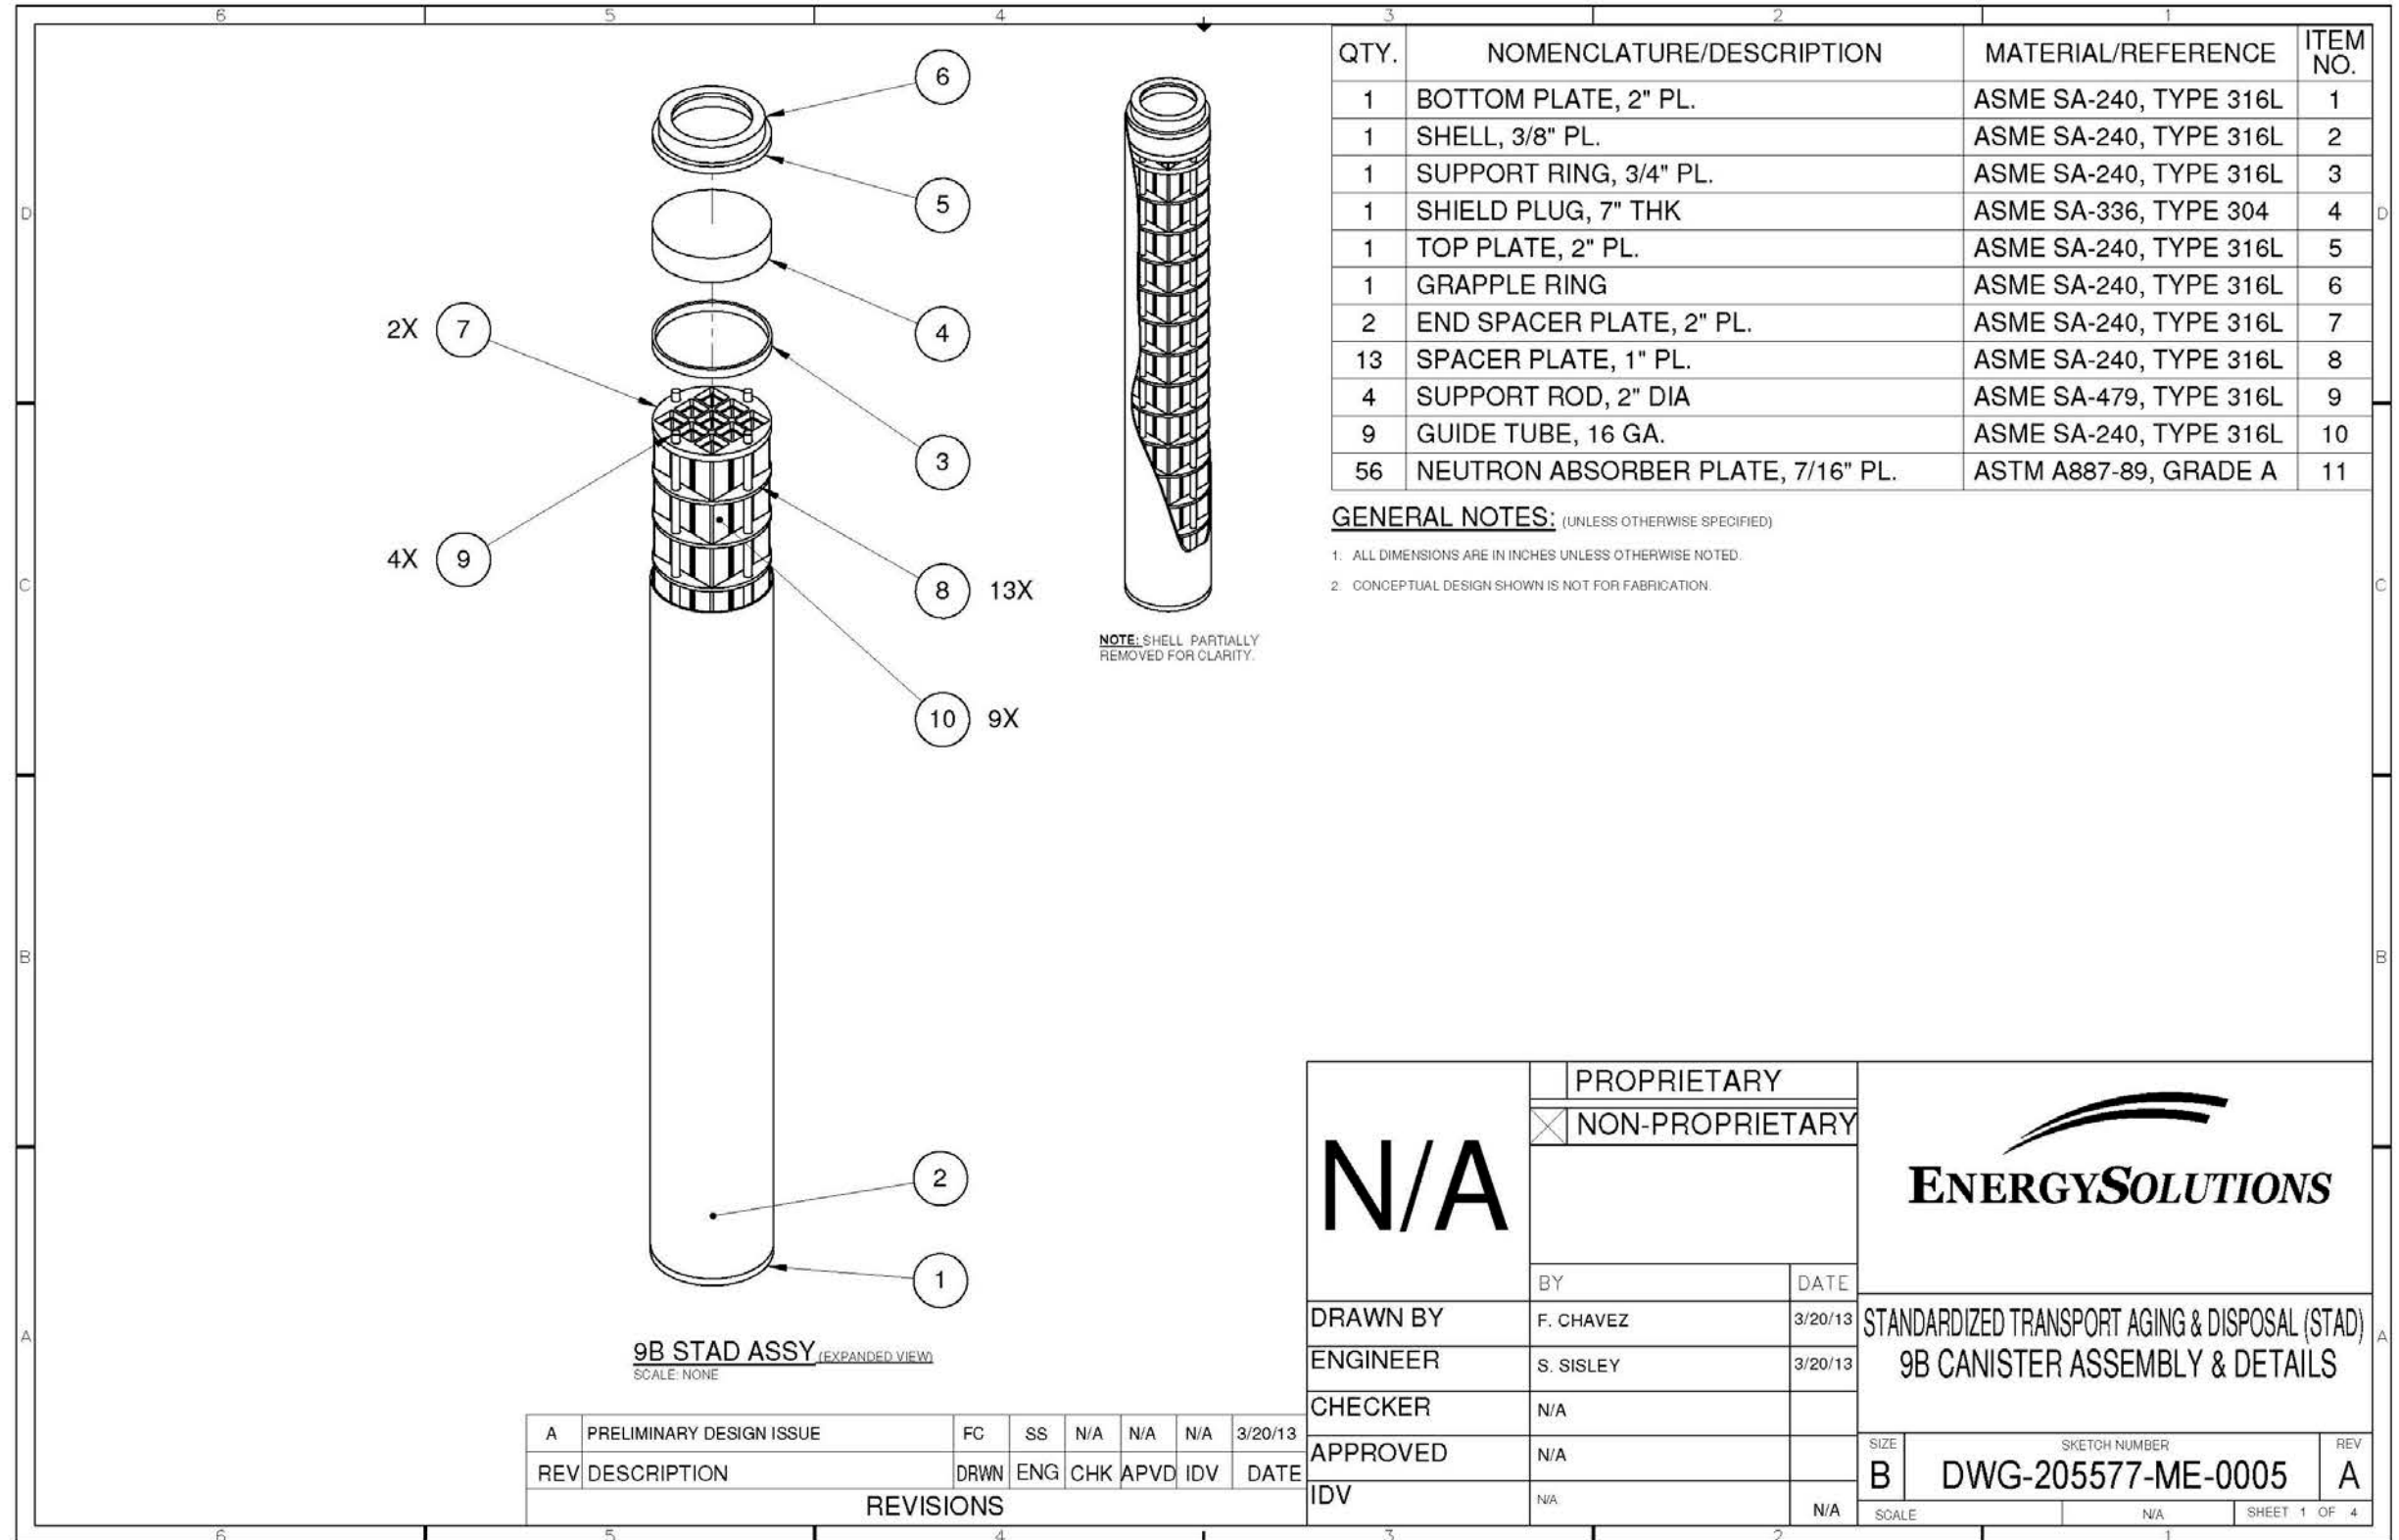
Standardized Transport, Aging and Disposal Canister - 9 BWR Assemblies - Assembly & Details – Sheet 2 of 4
